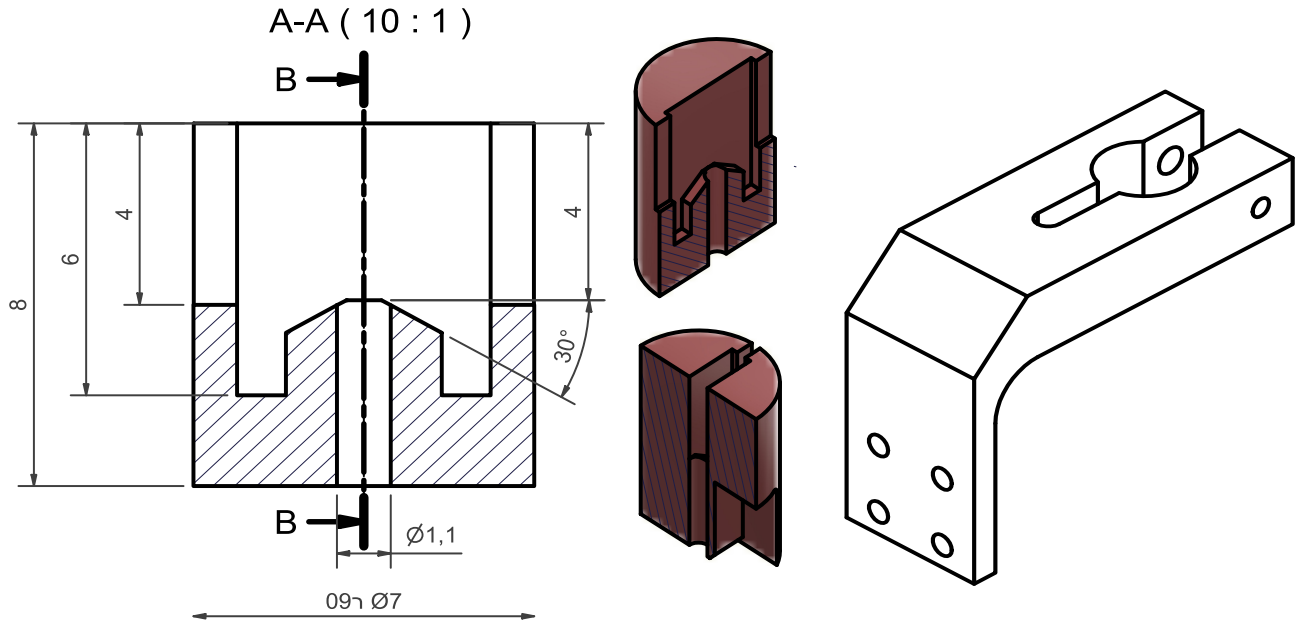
Mechanical drawing of the tip holder (left) made of PEEK and the titanium stage adapter (right).
